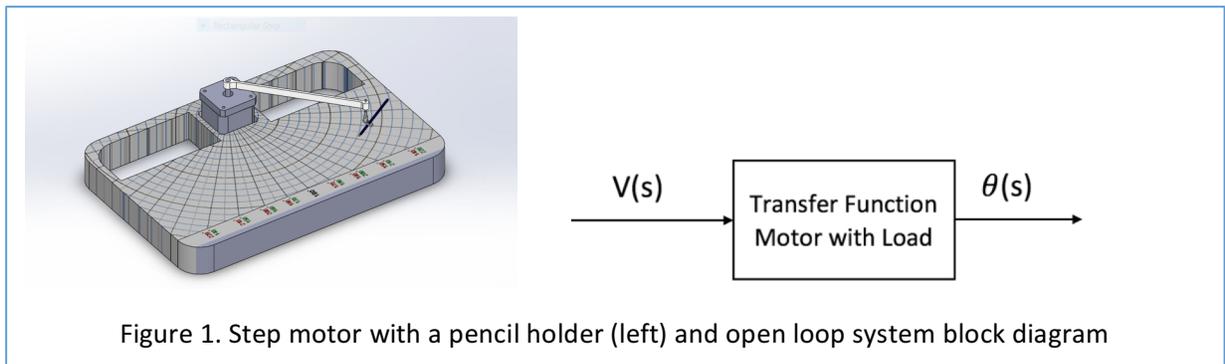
Step motor with a pencil holder (left) and open loop system block diagram
